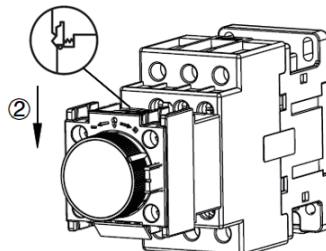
Disassembly method of F3 top-hung aux., FY3 air delay head
